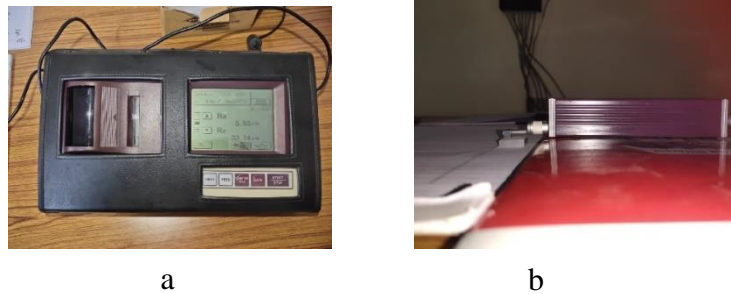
(a) Roughness Tester, (b) Probe on workpiece surface
